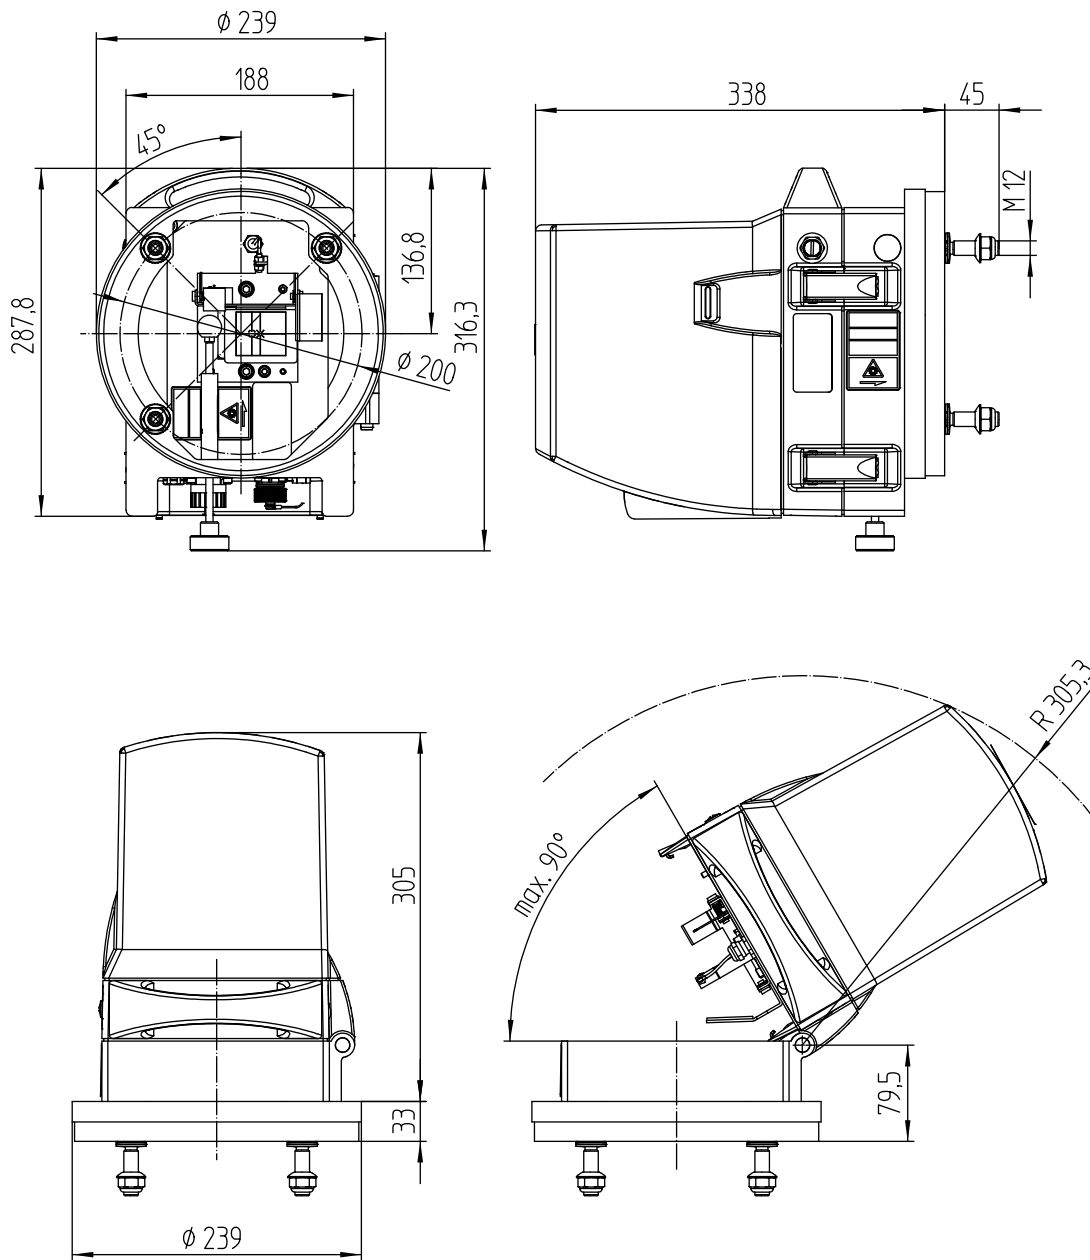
GM700 sender/receiver unit (dimensions in mm)
